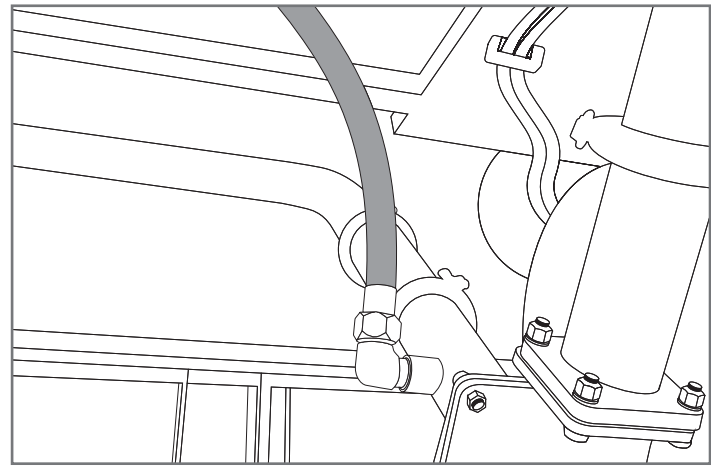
Coolant discharge port installed in non-turbocharged (supercharged) engine. Discharge port is located at radiator Y-pipe.
